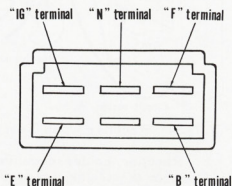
Regulator Wiring Harness Connection Plug G0334
